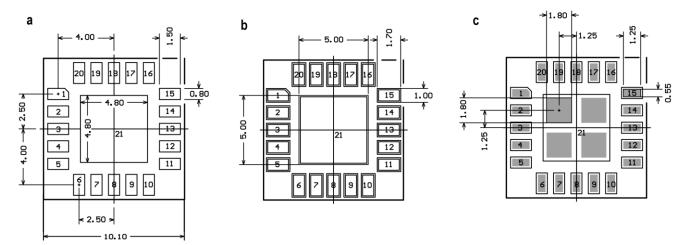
SCD42 footprint (top view): landing pads (a), solder mask (b) and solder paste (c).
